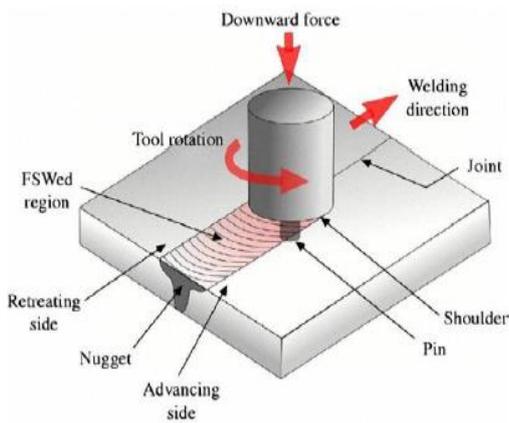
Schematic diagram of friction stir welding process [6]
